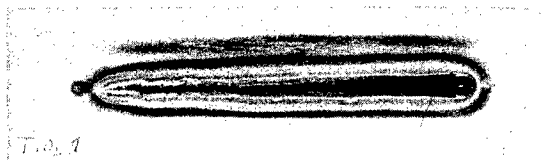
Weld Made Under Welding Grade Argon With TiO_2 on Surface
